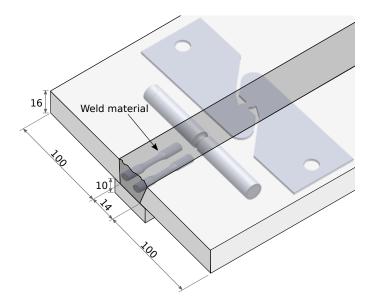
Illustration of the V-butt weld assembly and how the material test specimens were extracted.
